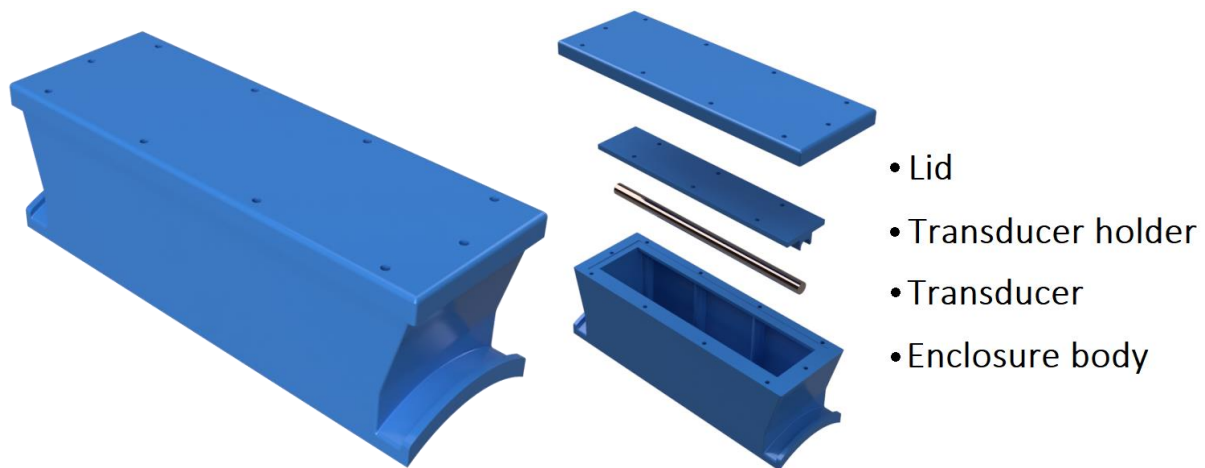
Version 2 of clamp-on designed for hose clamp mounting. Features a taller enclosure than version 1, with room for electronics.
